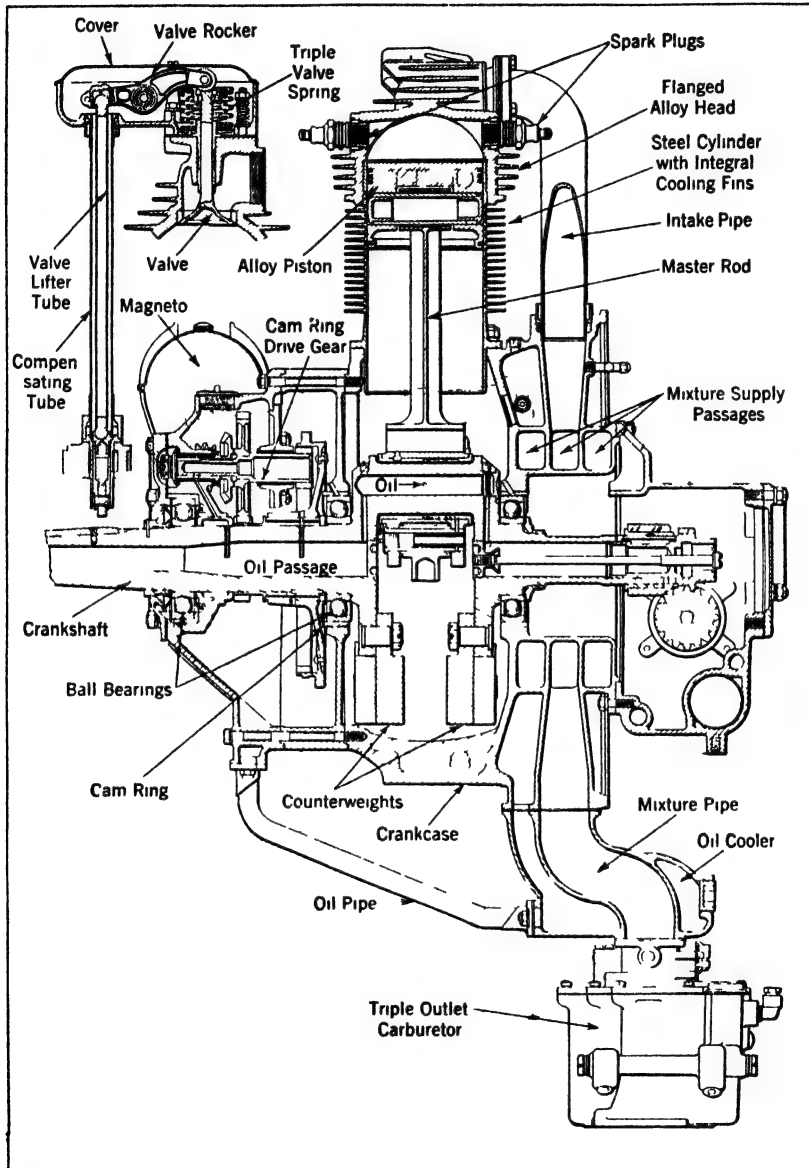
Sectional Diagram Showing Internal Construction of Wright "Whirlwind" Motor.
